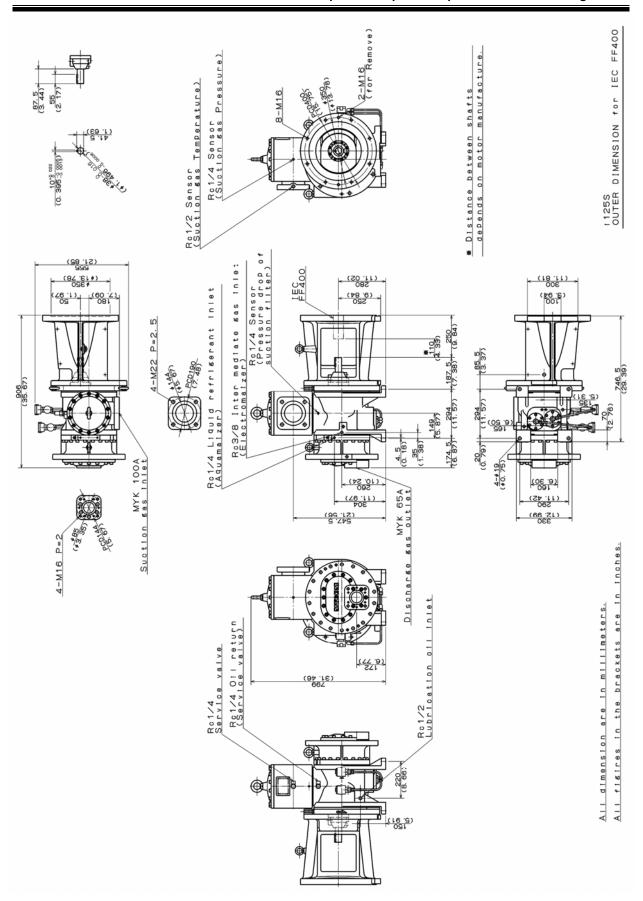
i125S Outer Dimensions with a Spacer for Flange Motor (IEC FF400)
